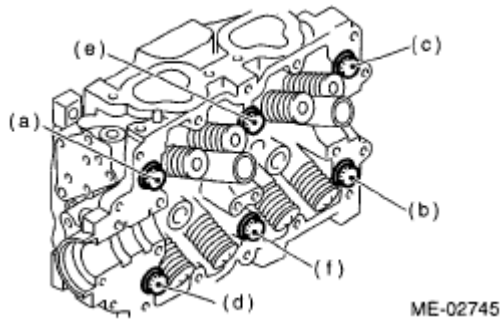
Removing Sequence Of Cylinder Head Bolts
